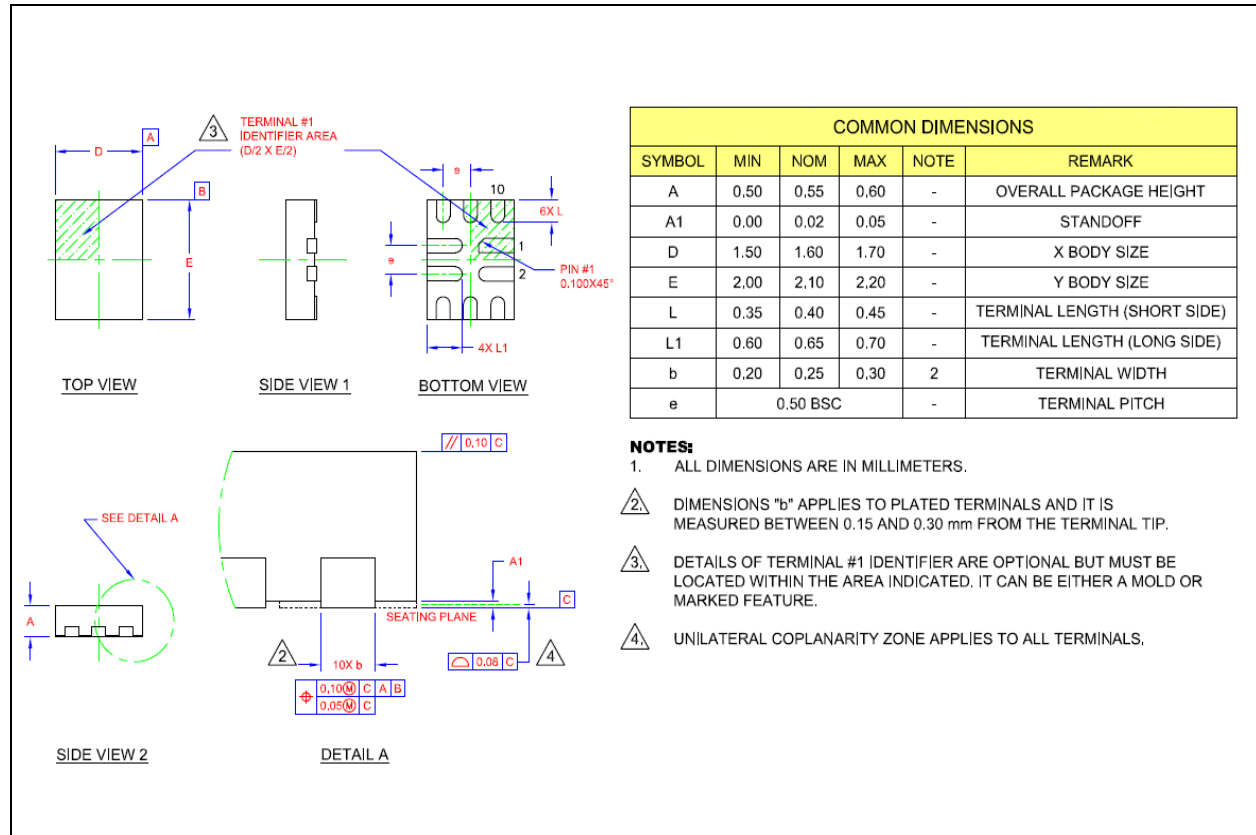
10 pin, 1.6mm x 2.1mm QFN Package Outline
